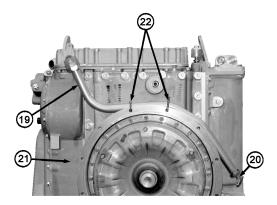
Oil Fill Tube Assembly. (X200-4A Only)
